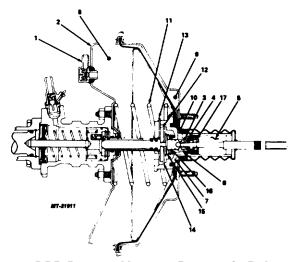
DPB Booster Vacuum Booster in Released Position.
